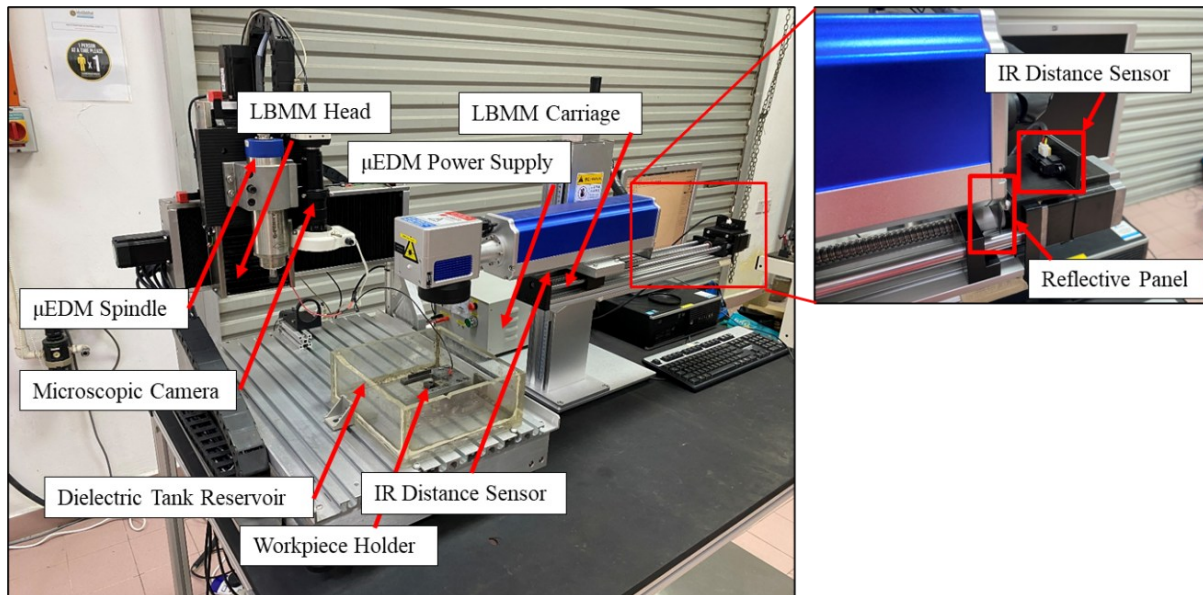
Physical setup of the hybrid Laser Beam Micromachining (LBMM) and micro-EDM (μ EDM) system, showing the integrated configuration used for sequential machining operations on a shared workpiece.
